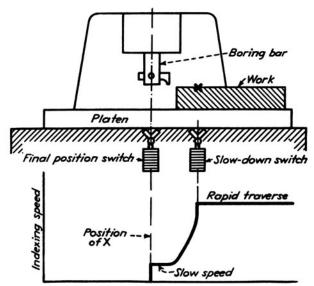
Accurate location of boring tools for indexing requires extremely slow speed of work table to prevent overtravel when stop limit is reached. A direct-current motor and control is used; heavy armature series resistance and armature parallel resistance provide for creep speeds for final positioning.
